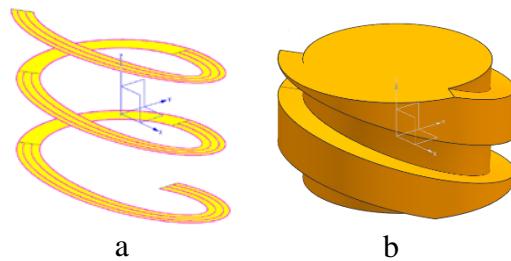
The working contour surface and cam solid of cylindrical indexing cam
